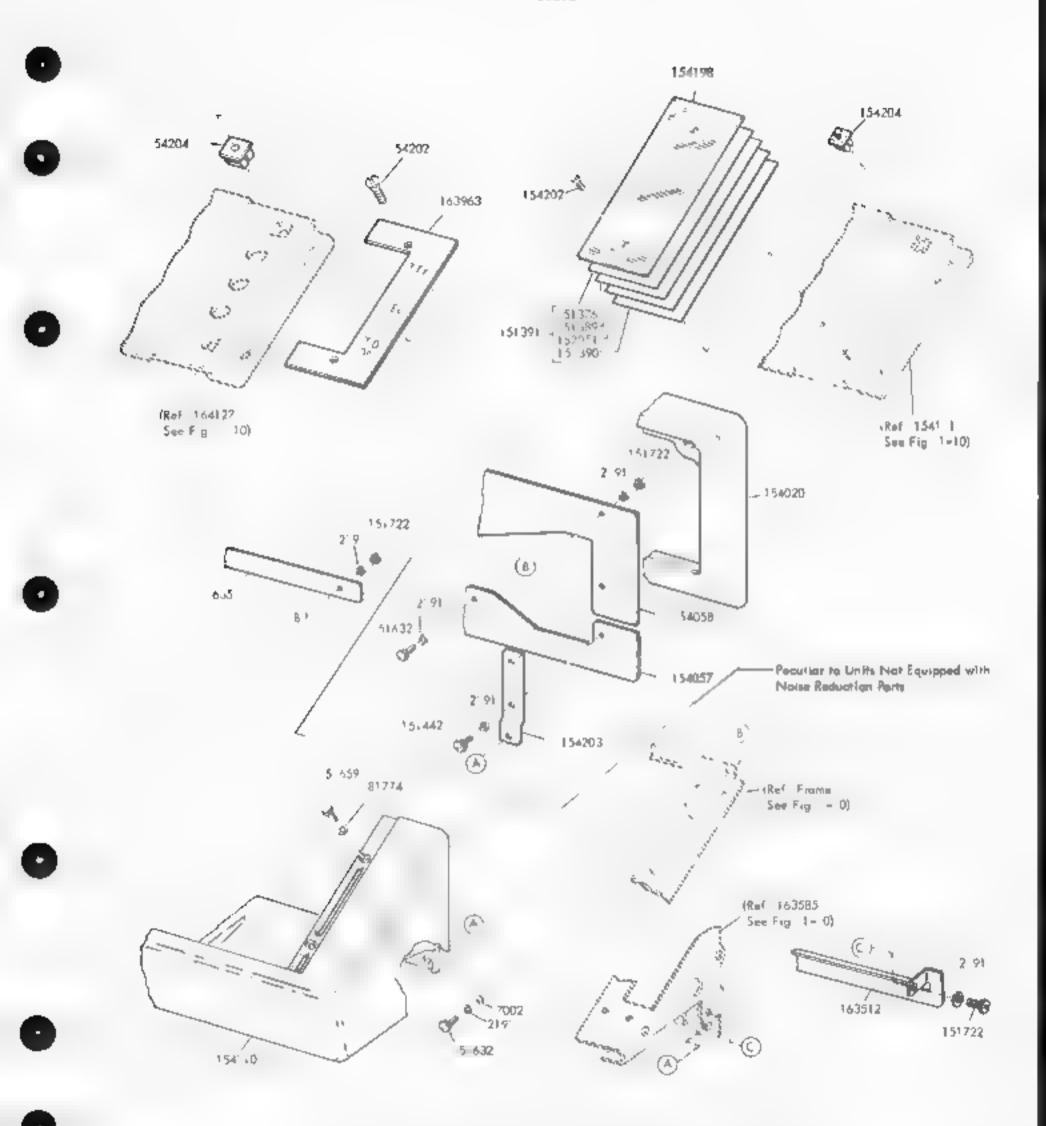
KEYBOARD HOOD AND MOUNTING PARTS
